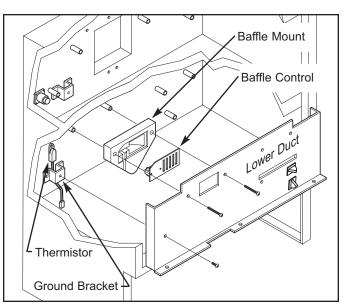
700BC/I-3 Lower Duct, Baffle Control Assembly and Freezer Compartment Thermistor
